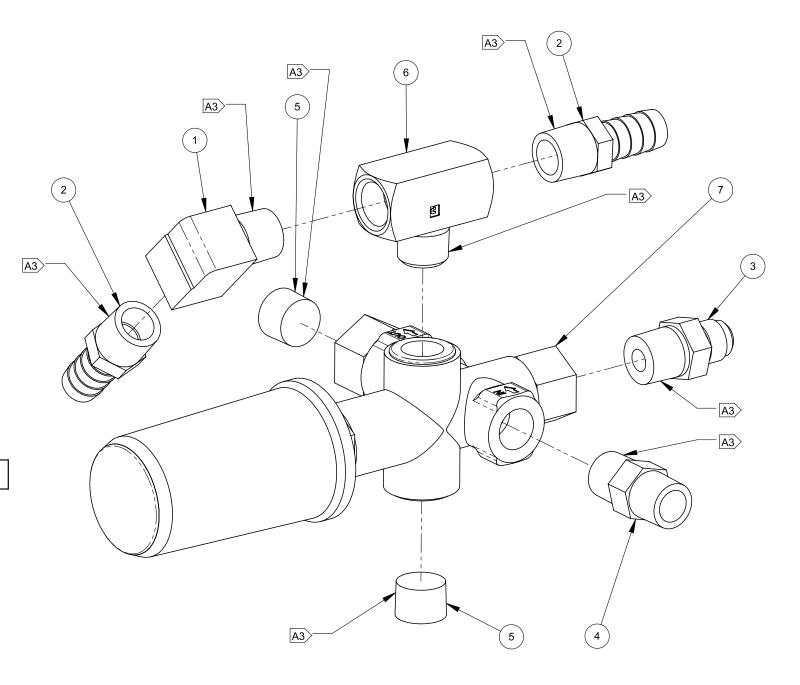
By-Pass Valve Assembly 610-009-747 Rev. A
